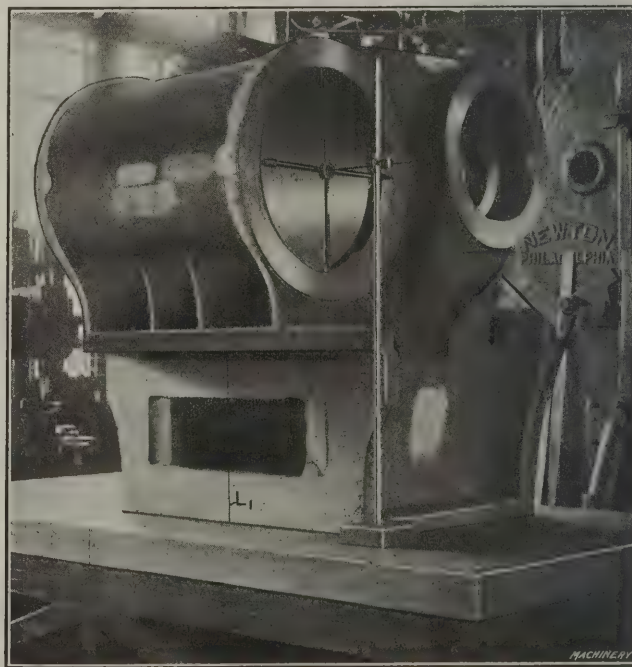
Another View of Cylinder on Testing and Laying-out Plate
